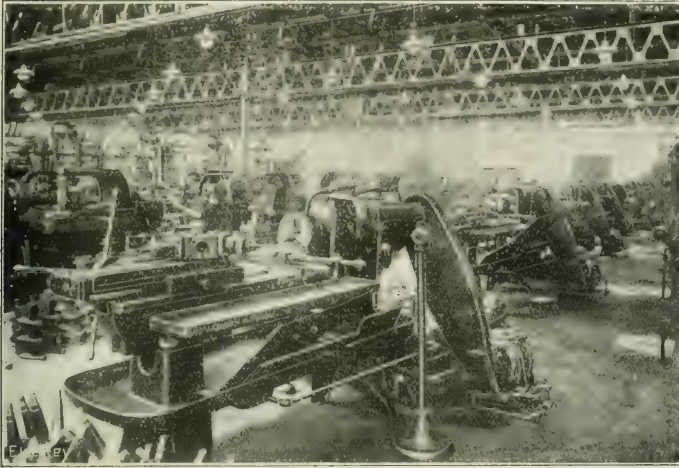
CAPSTAN LATHES WITH CHAIN DRIVE.
